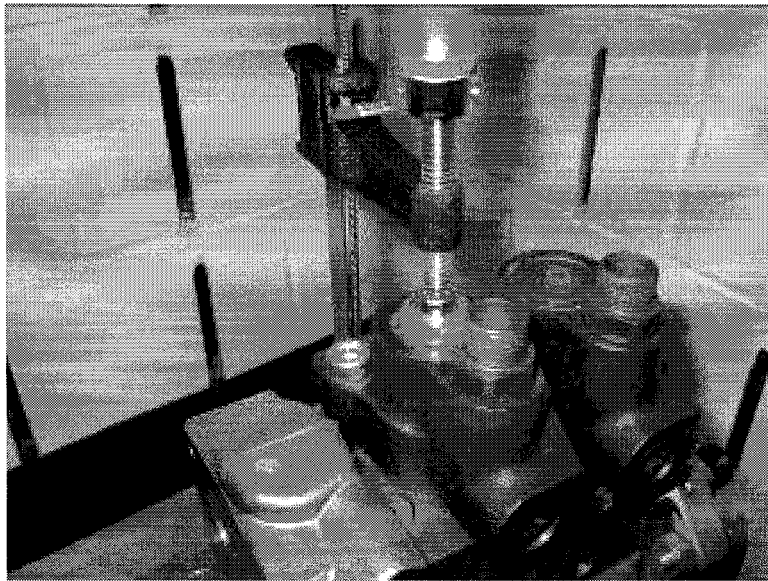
High Pressure Fuel Pump With C-Clamp On Front Element
